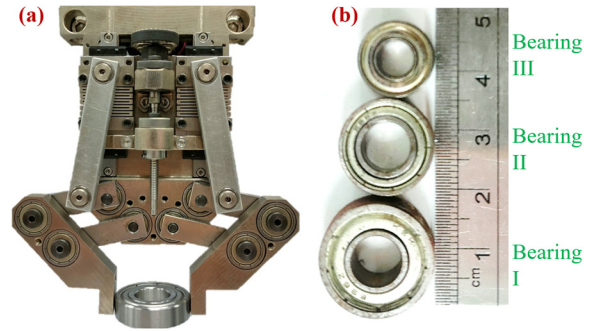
(a) Gripper grasping and measuring the size of a bearing (b) Bearings of different sizes
